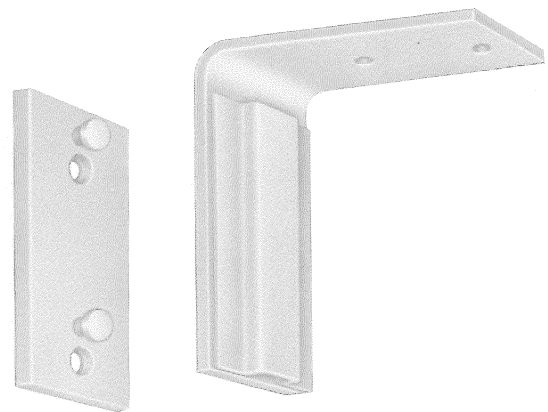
KS-16422, List 4 Mounting Bracket Assembly
